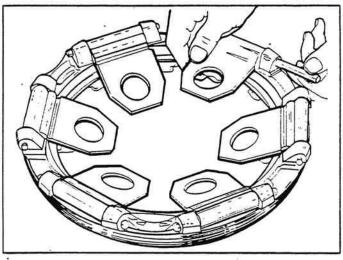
Remove Retainer Clips, Pins and Levers.
